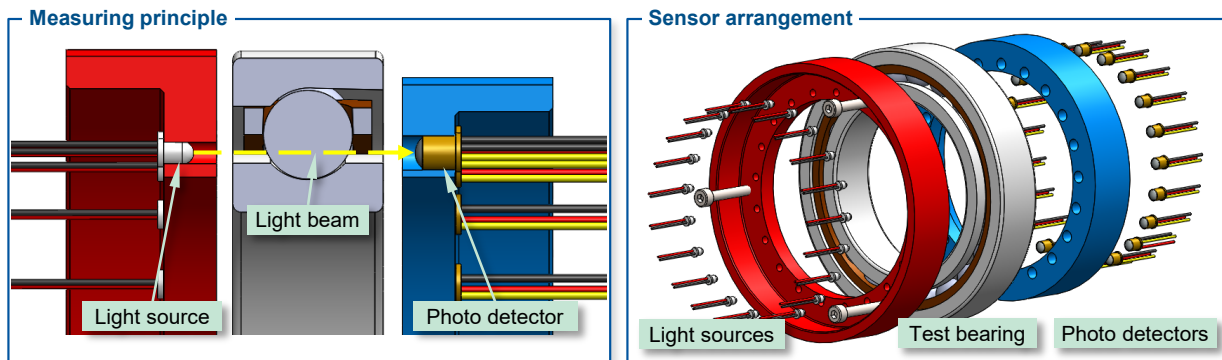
Optical measuring system for detecting the ball position in a spindle bearing
